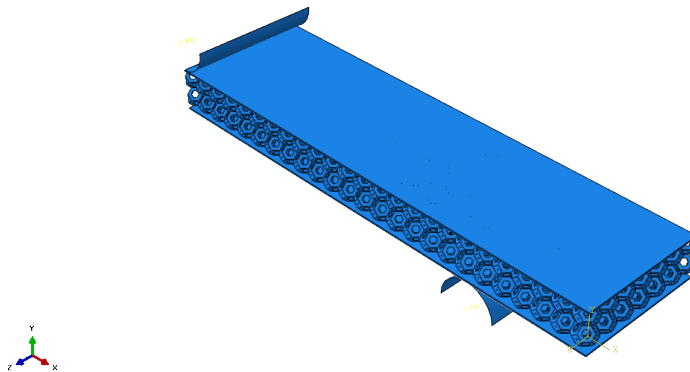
Example of sample assembly of ¼ part location supports (model presented is TO-025-02-2).
